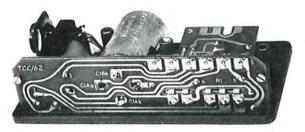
JACK-UNIT No. 1A WITH COVER REMOVED
